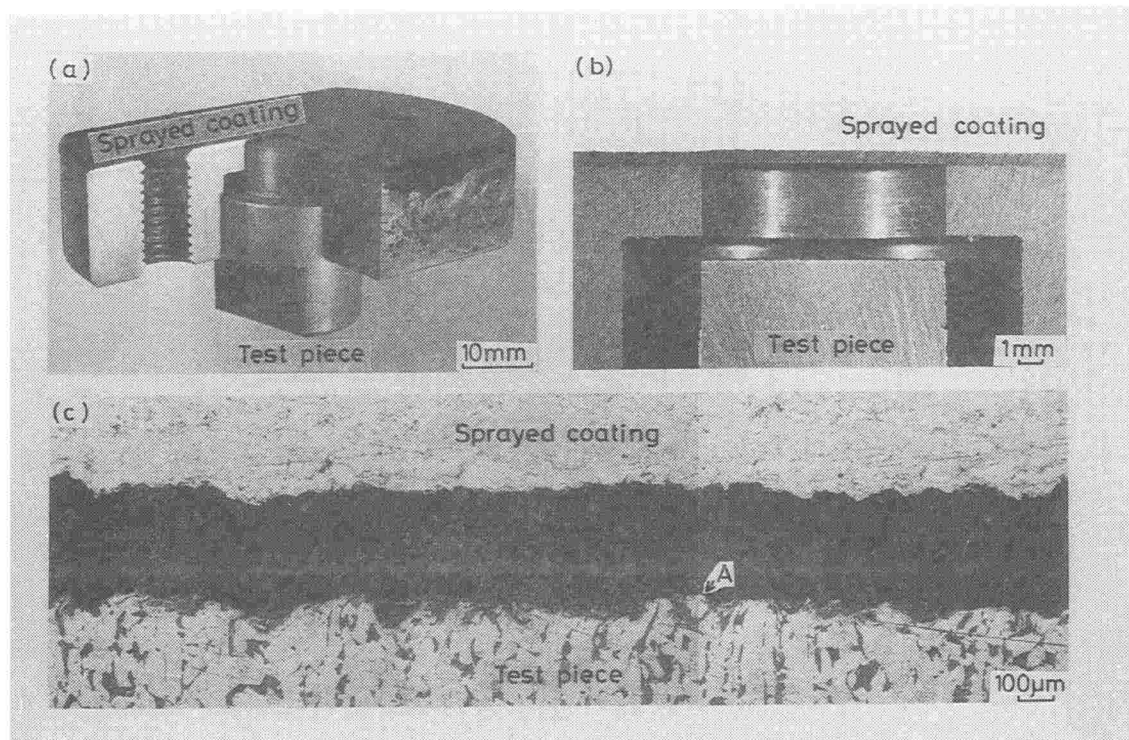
Ruptured specimen: (a) whole of specimen, (b) macro-scopic view, (c) micro-scopic view.
